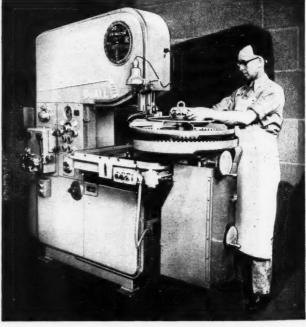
DoAll "Contour-matic" band machine equipped with fixture for cutting around circumference of bucket-equipped turbine wheel.
